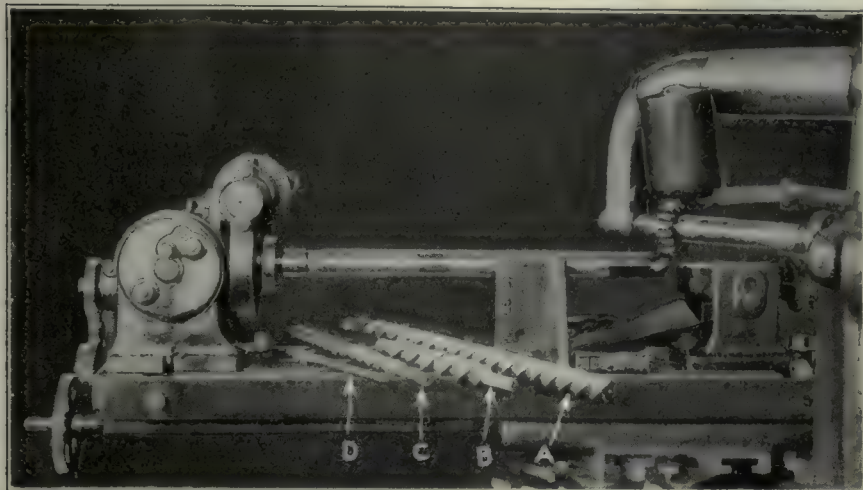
MILLING FLUTES IN SPIRAL CUTTERS
